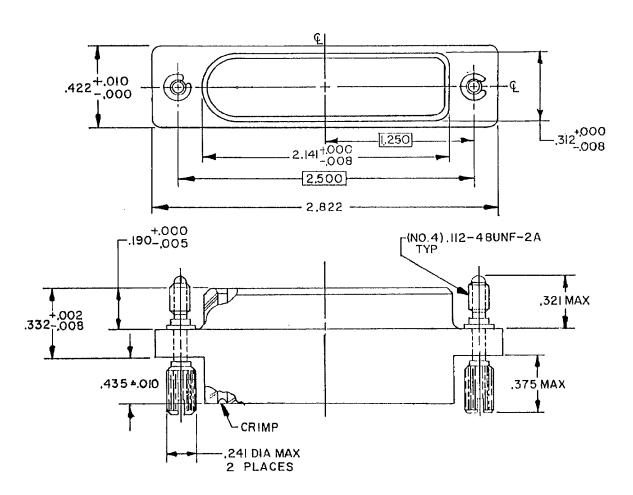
Connector, plug, .100 (2.54 mm) contact spacing, removable crimp socket.
